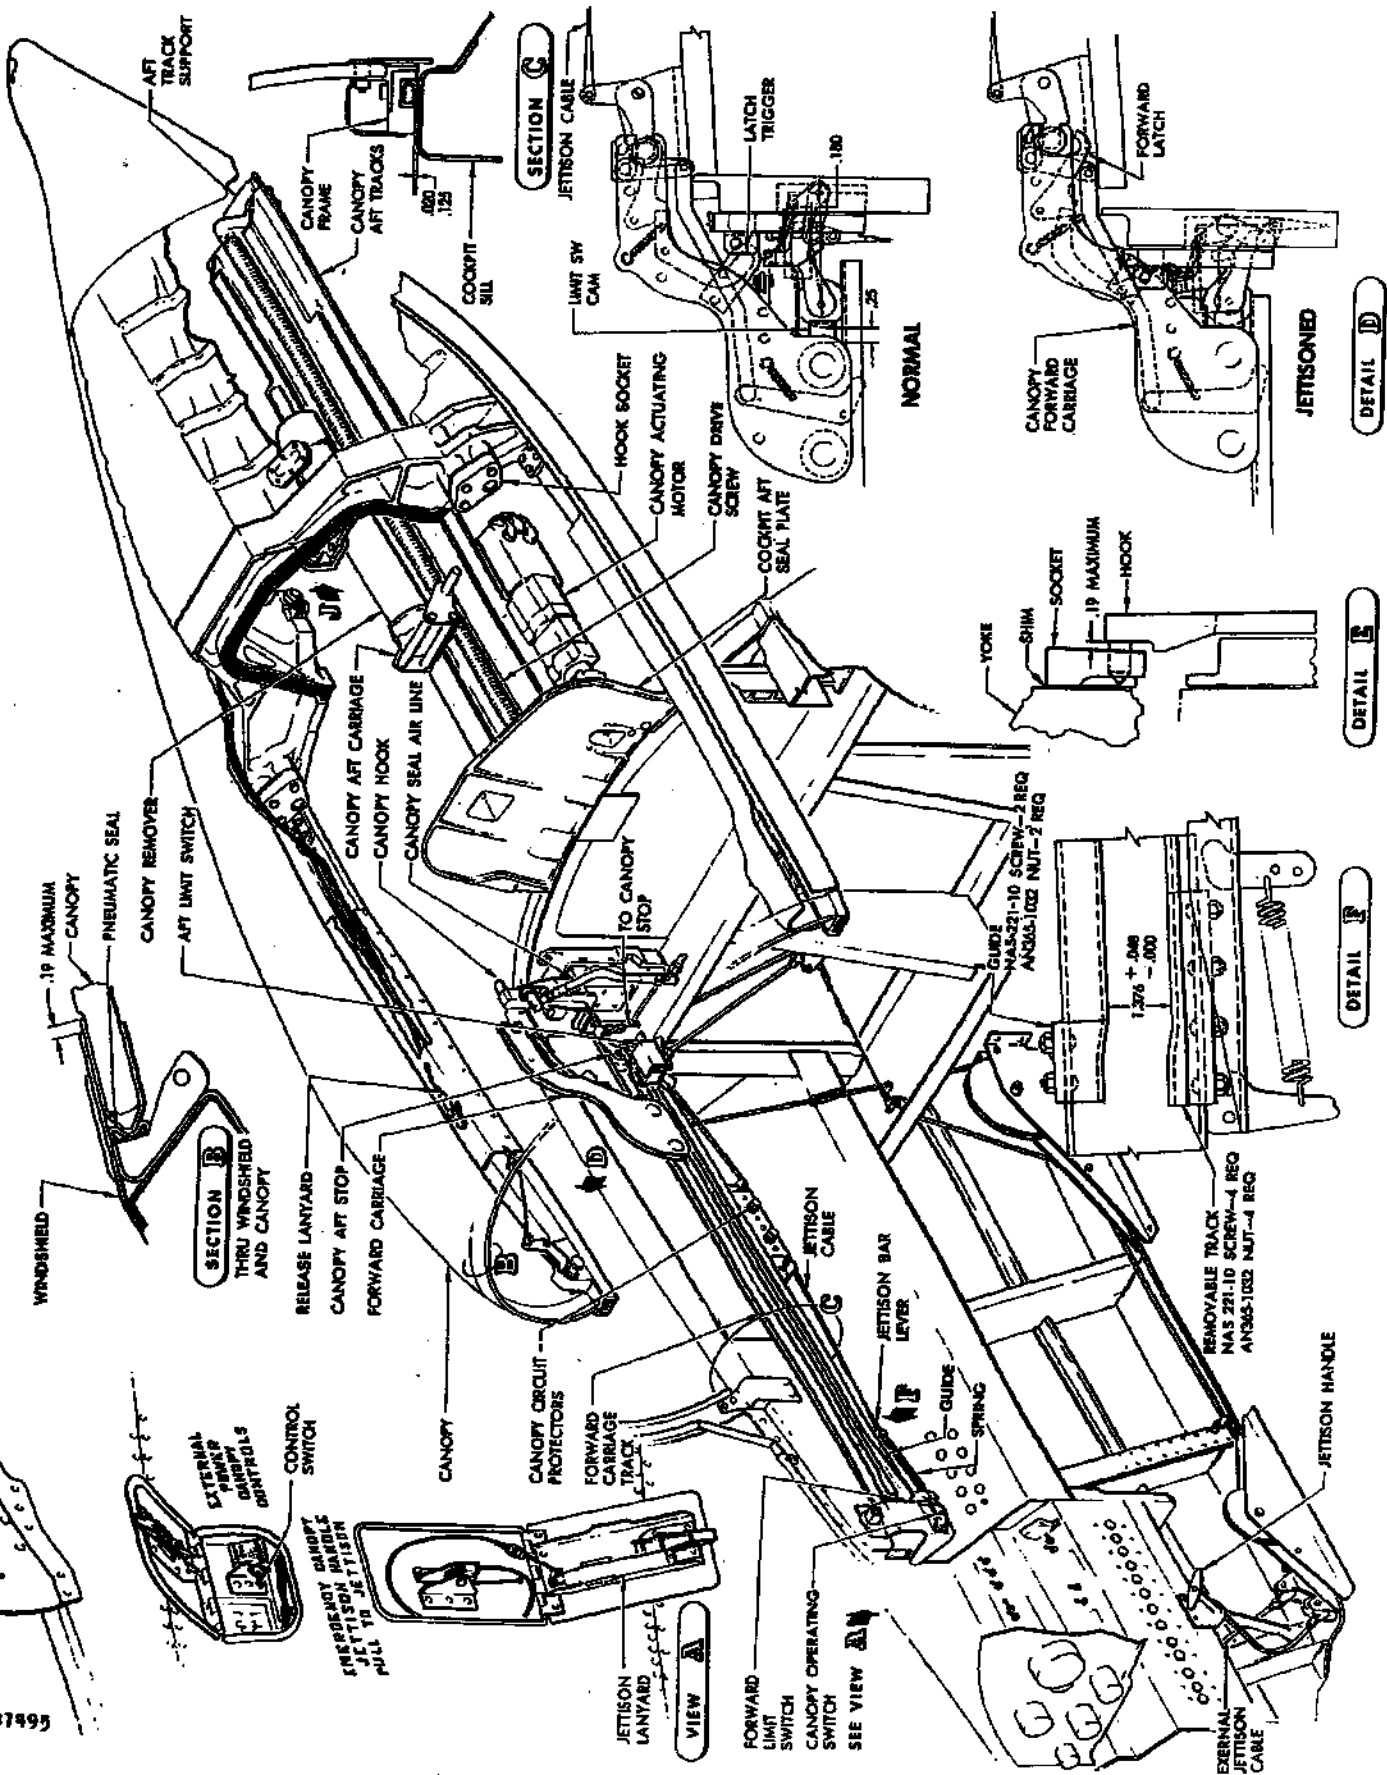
A (Sheet 1 of 3 Sheets)—Canopy Jettison and Electrical Operating Mechanism
